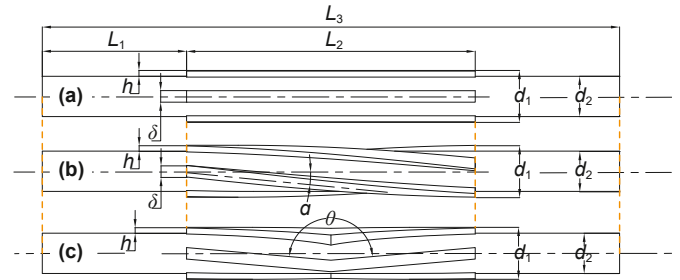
Geometry of three kinds of cuttings bed removers. (a) Straight blade cuttings bed remover. (b) Positive spiral cuttings bed remover. (c) “V” blade cuttings bed remover.
